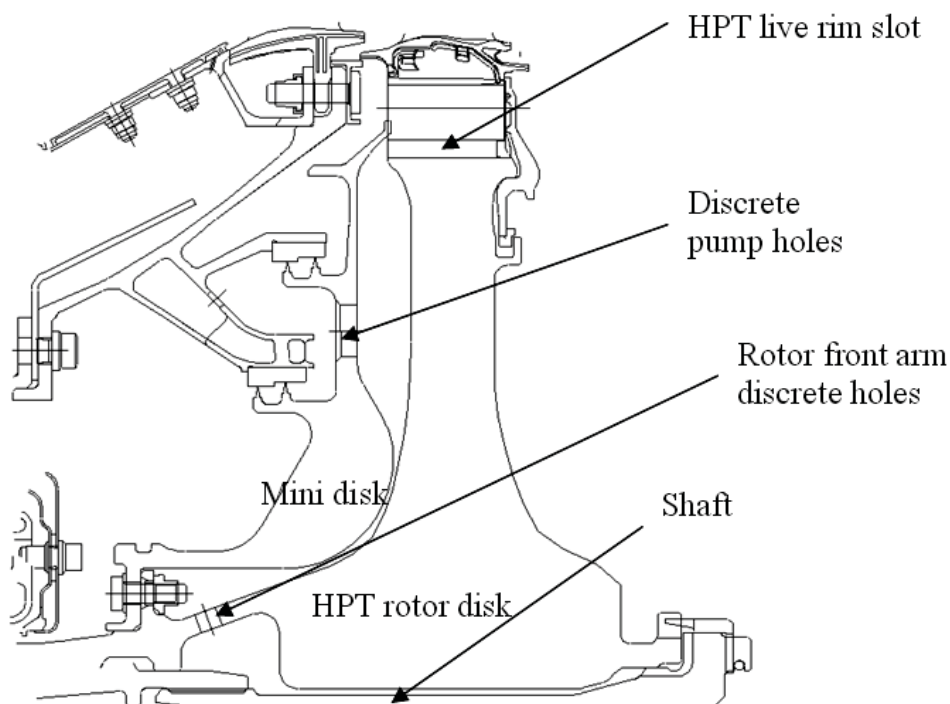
Geometry of HPT Rotor Disk of PW 6000 jet engine (Pratt & Whitney Company)
